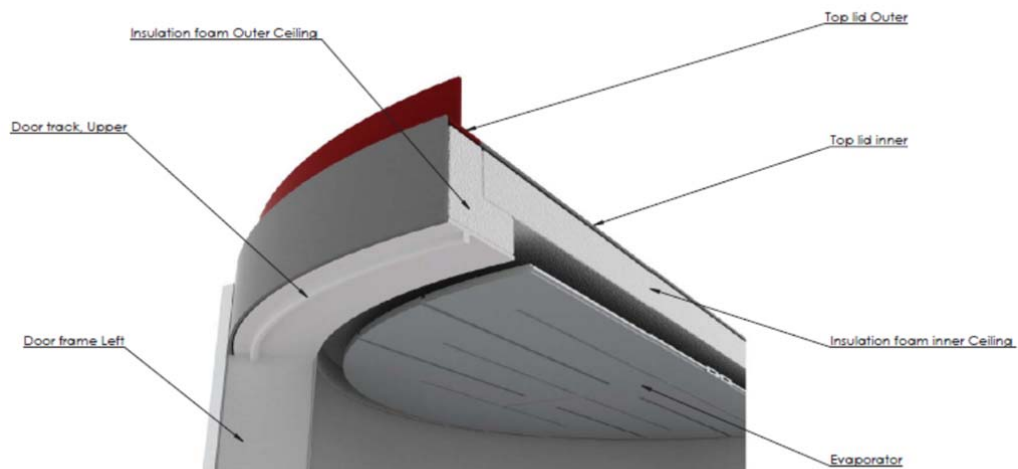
Section picture of refrigerator chamber with evaporator plate (upper view)
